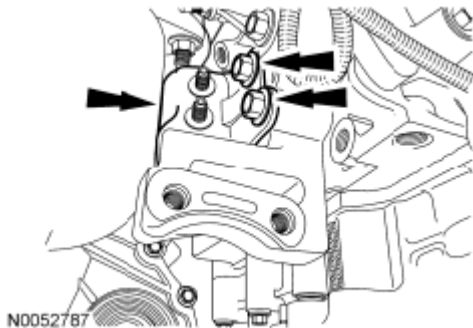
Locating RH Exhaust Heat Shield Bracket & Bolts
